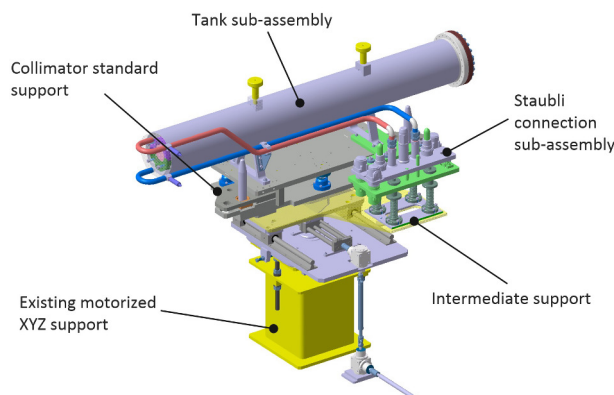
BDF target prototype supporting structure and interfaces assembly.
